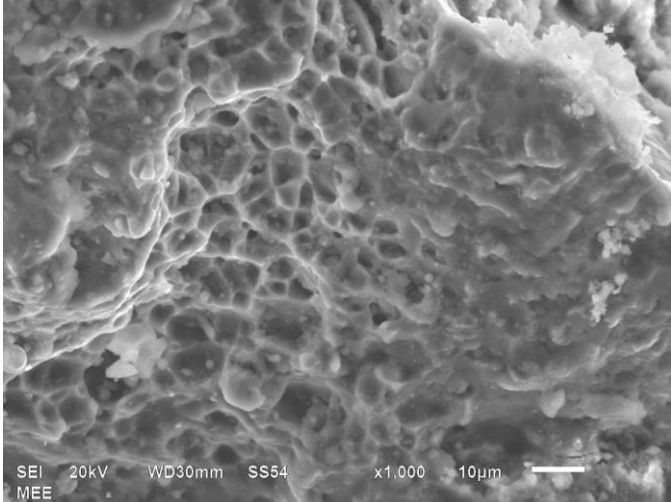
1000X Sample 1, Ductile Rupture and Corrosion near Outer Surface of Weld
